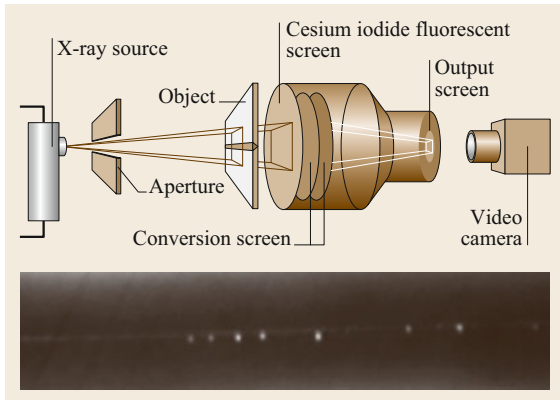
Radioscopic equipment and x-ray image of a weld with pores
